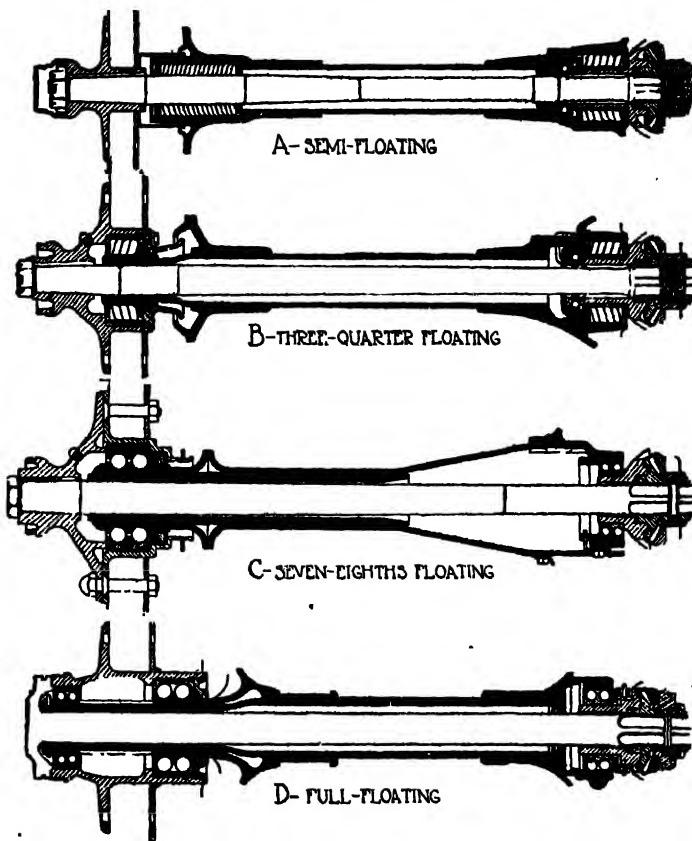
Defining Principal Types of Weston-Mott Rear Axle Construction.
